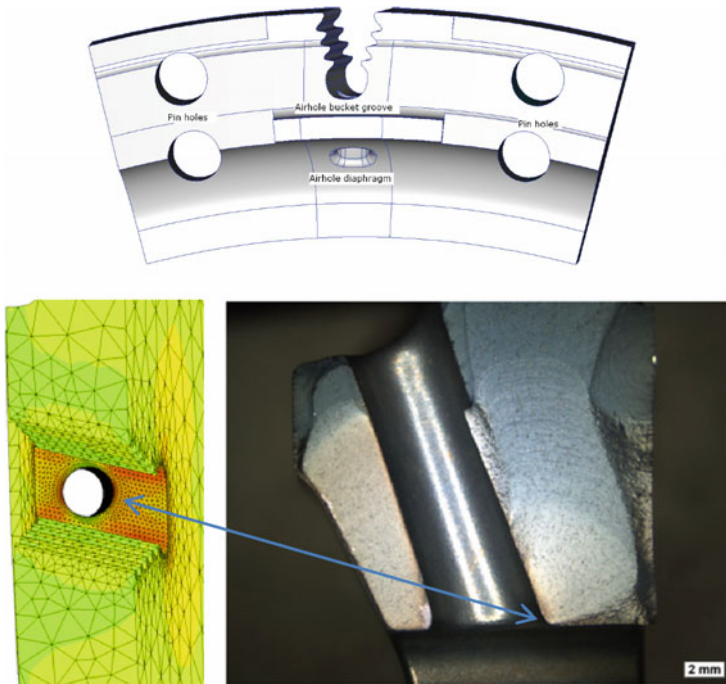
Subcomponent air hole test specimen, FEM model, fracture surface, by courtesy of RRD
